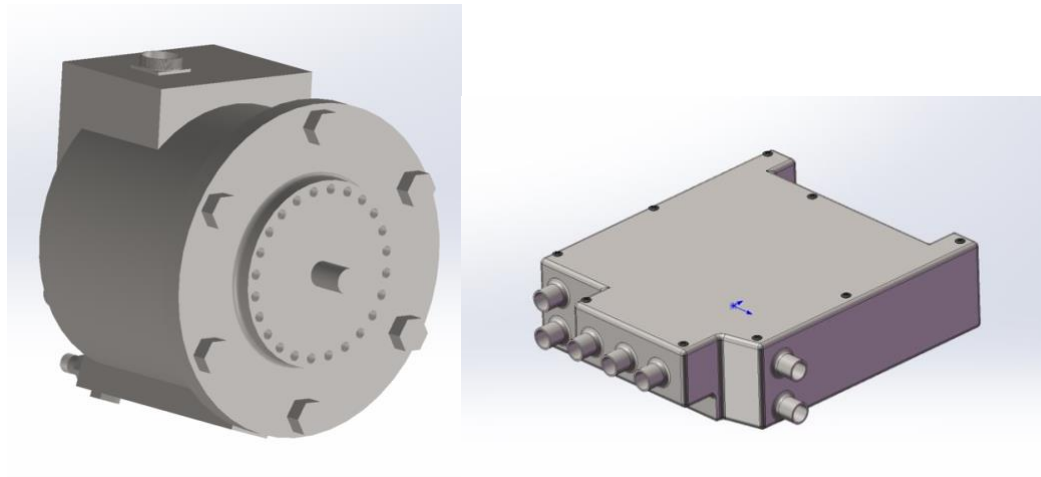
Remy Motor (left) and Dana Motor Controller (right)
